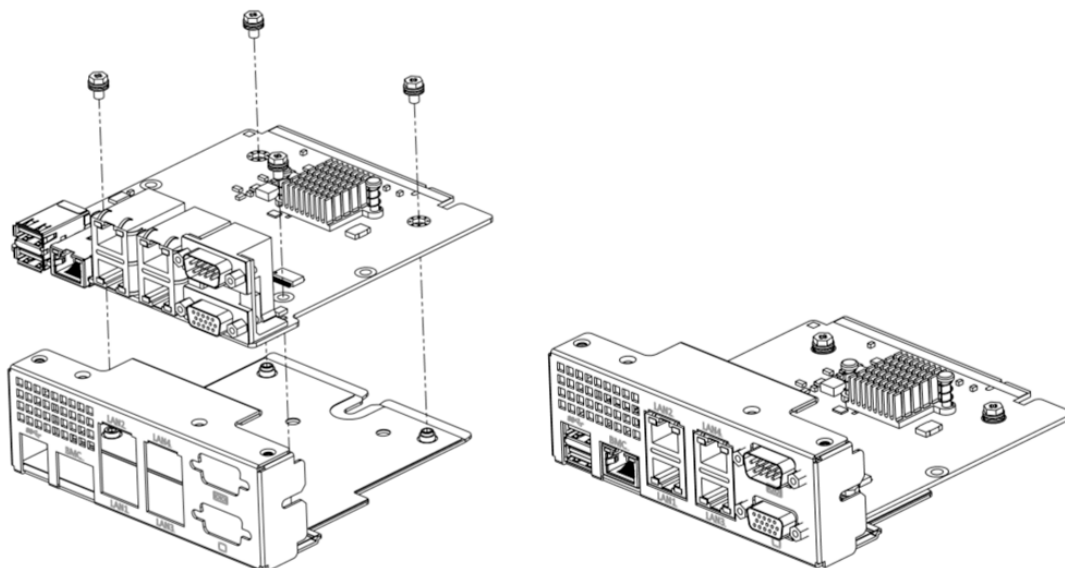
IO Module assembly/I0 模块安装 /I0 模組安裝
